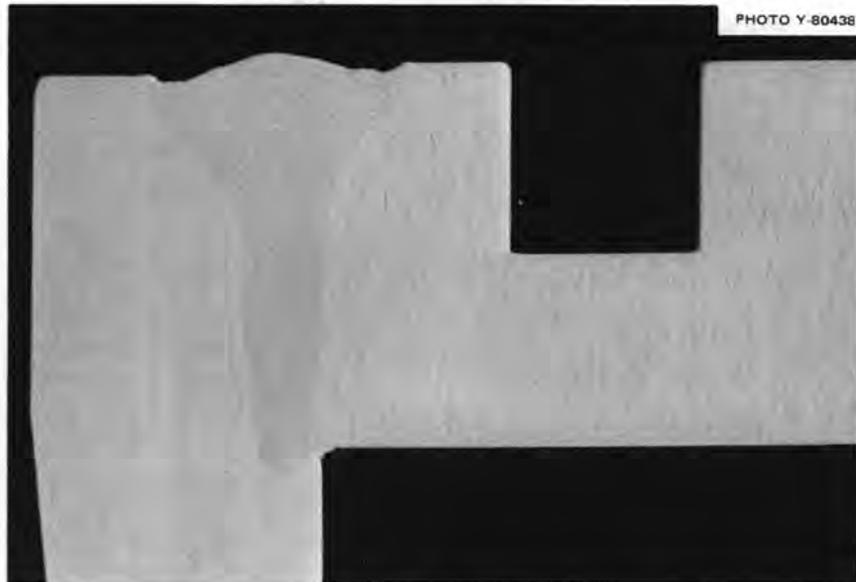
Electron-beam weld Hastelloy Alloy-C capsule.
